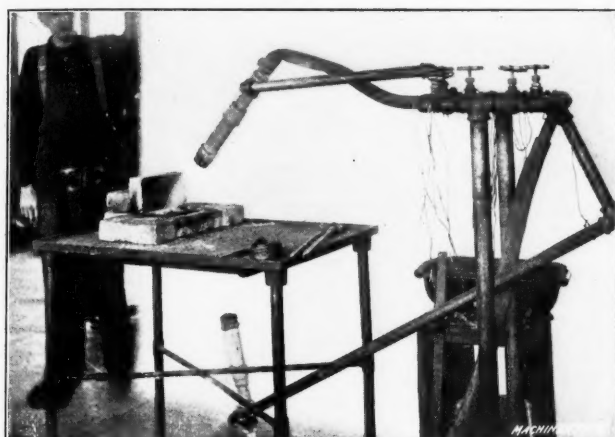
A Simple and Inexpensive Form of Burner and the Stand which are used for Brazing
